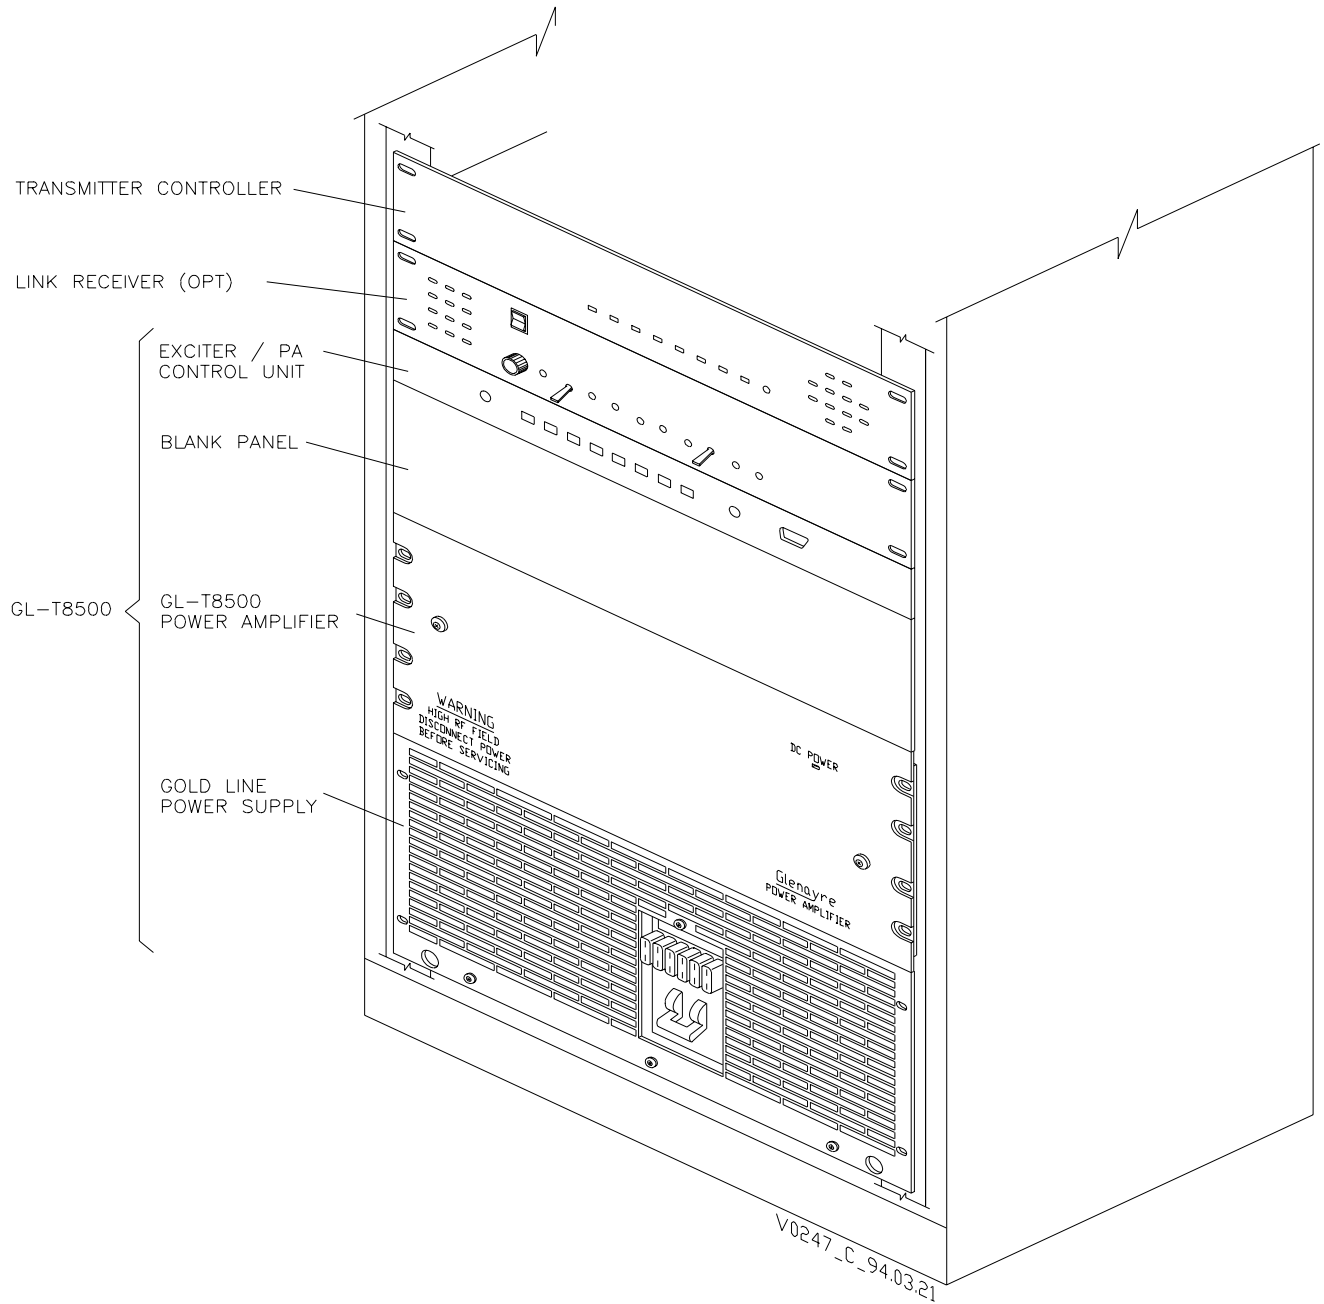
GL-T8500 Transmitter Isometric Front View
